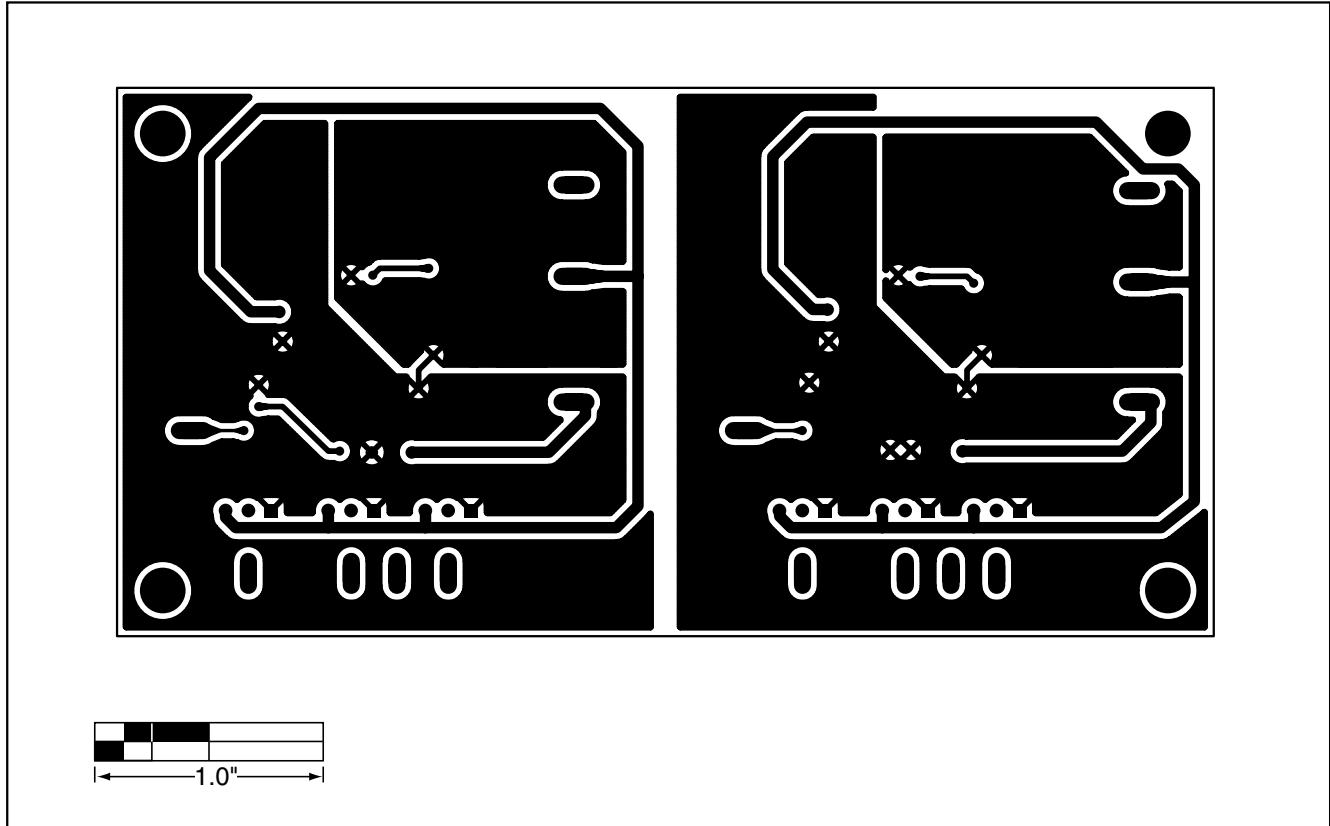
MAX1677 EV Kit PC Board Layout—Solder Side
